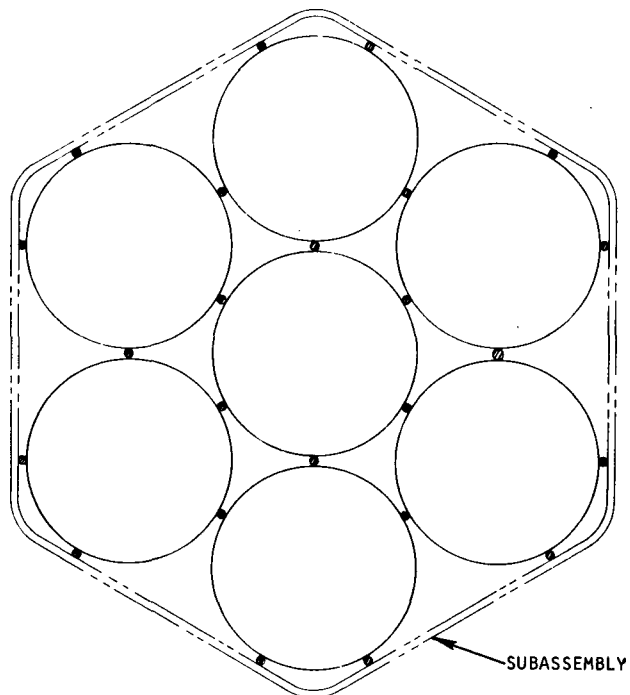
Subassembly design with wire-wrapped capsule configuration
